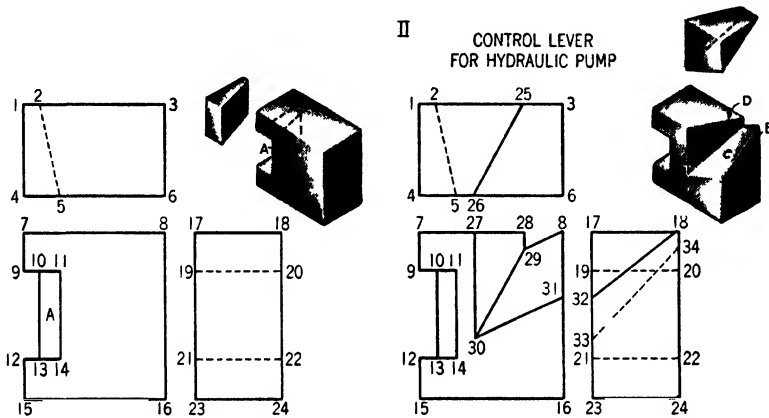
MACHINING A "CONTROL LEVER" — INCLINED AND OBLIQUE SURFACES
